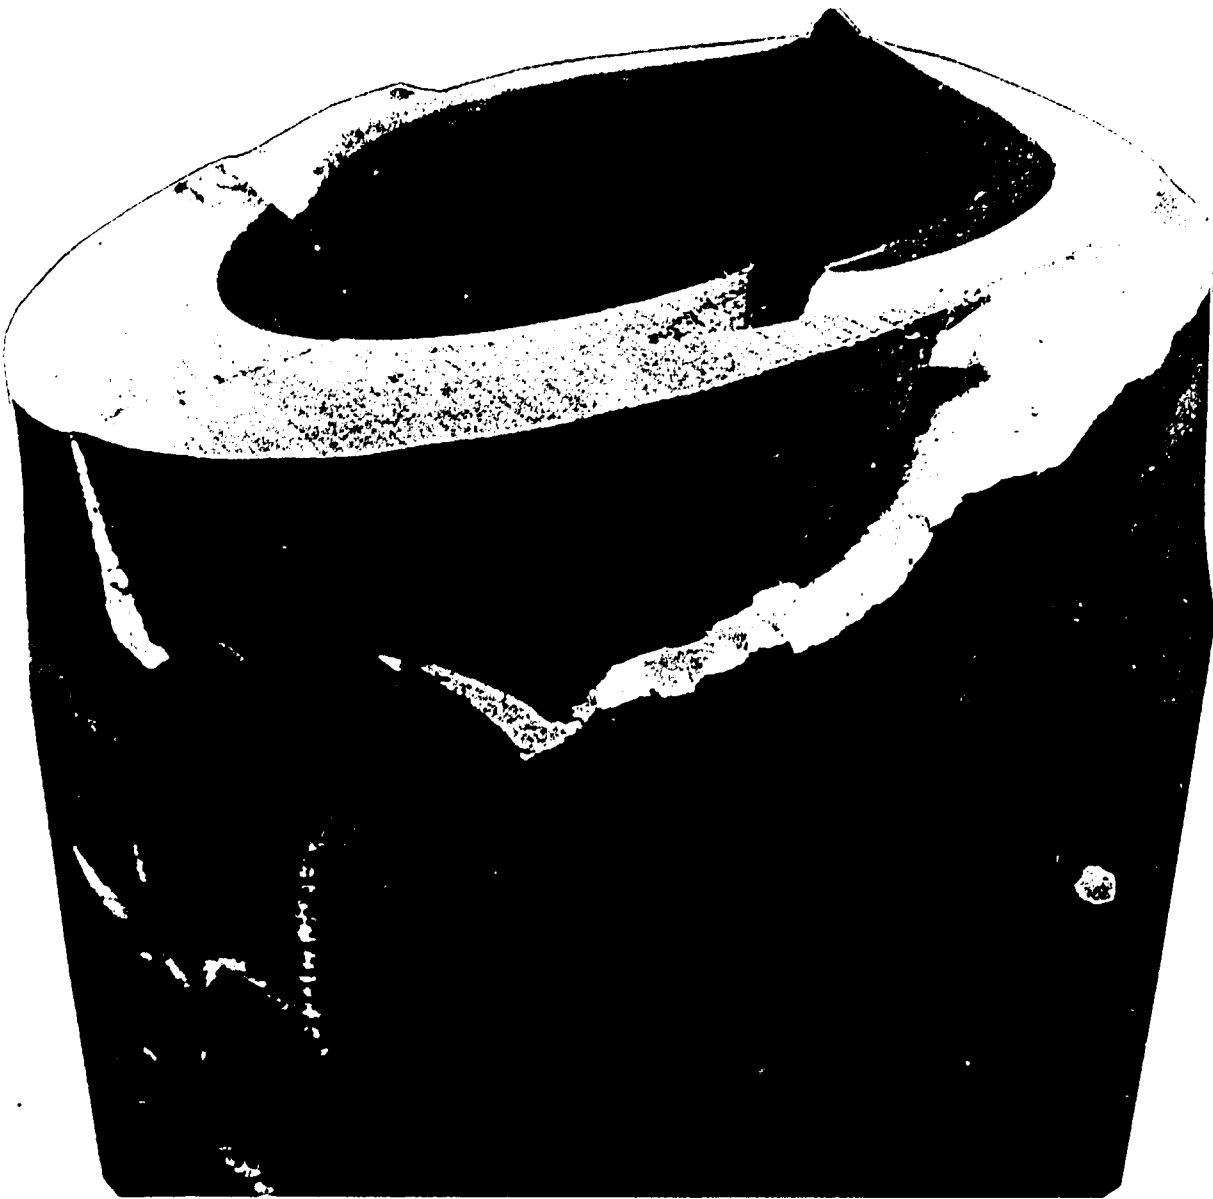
Side view of fracture surface showing secondary cracking (longitudinal direction).
